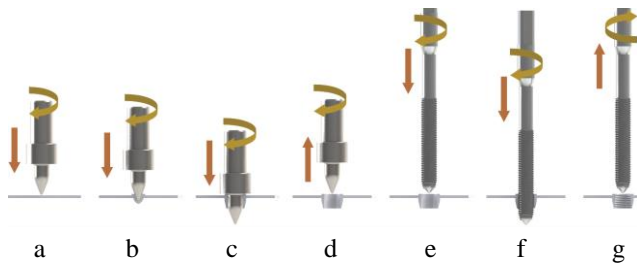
Stages of hole and thread forming in a thin plate: a – initial contact; b – former-tip penetration into the material; c – material flow and hole forming; d – former withdrawal; e – fast travel of the taper to the workpiece; f – extrusion tapping; g – taper withdrawal
